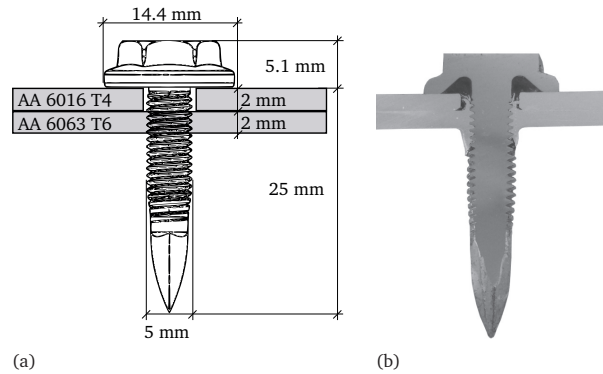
FDS connection. (a) Schematic drawing. (b) Picture of the cross-section.
